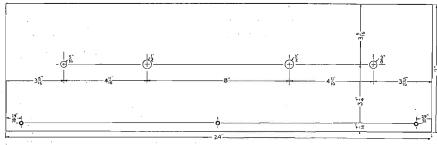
Sub base drilling DRAWING. "If drilled carefully, assembly takes but 20 minutes"
